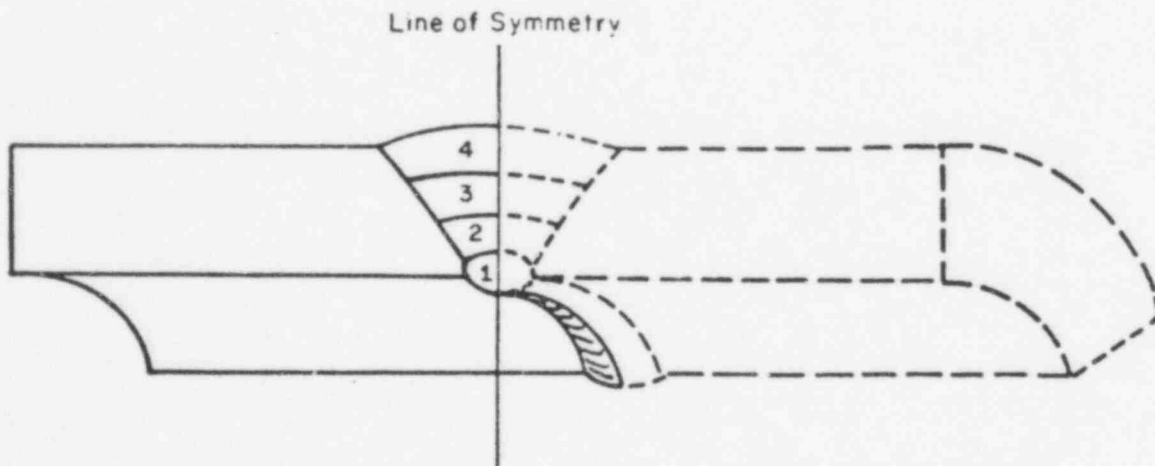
ILLUSTRATION OF GIRTH-BUTT WELD
